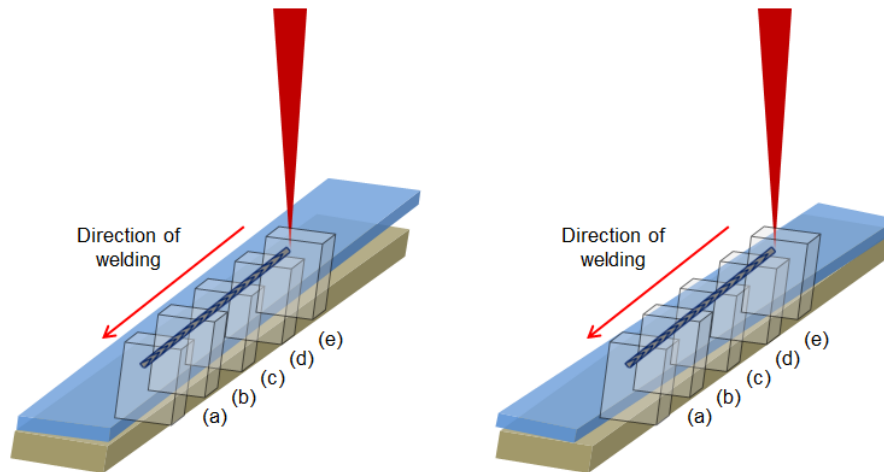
A schematic drawing of cross-sections arranged on the basis of their directions of welding
